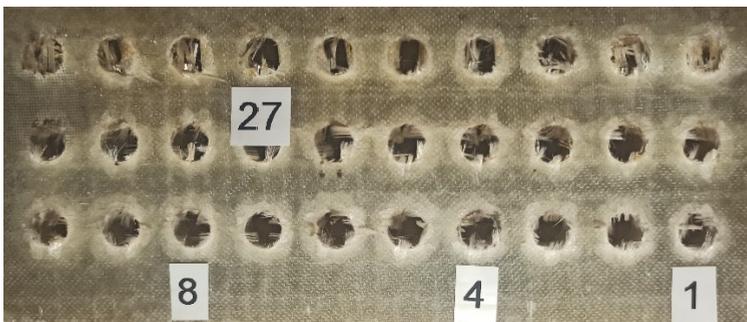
Sample back side view; holes #1, 4, 8 and 27 marked
